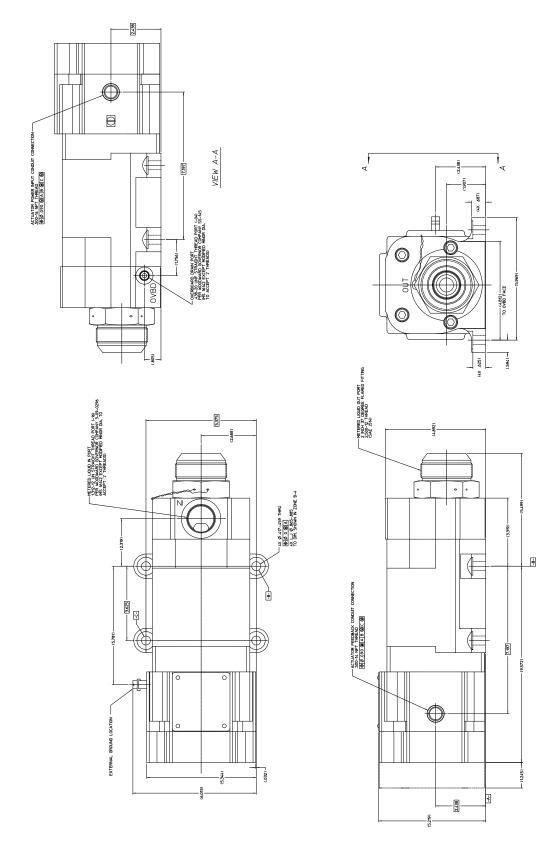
LQ Bypass Outline Drawing - Single Resolver
